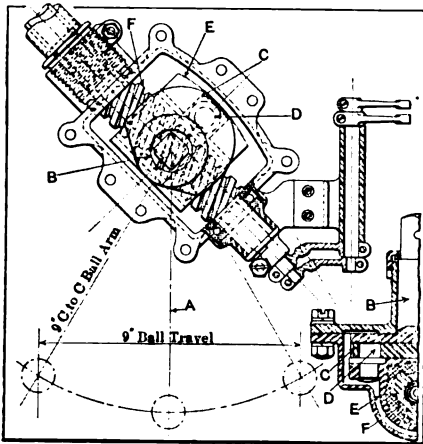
Section in two planes of the Graef-Arthur steering gear, showing relations of the parts and nice construction
